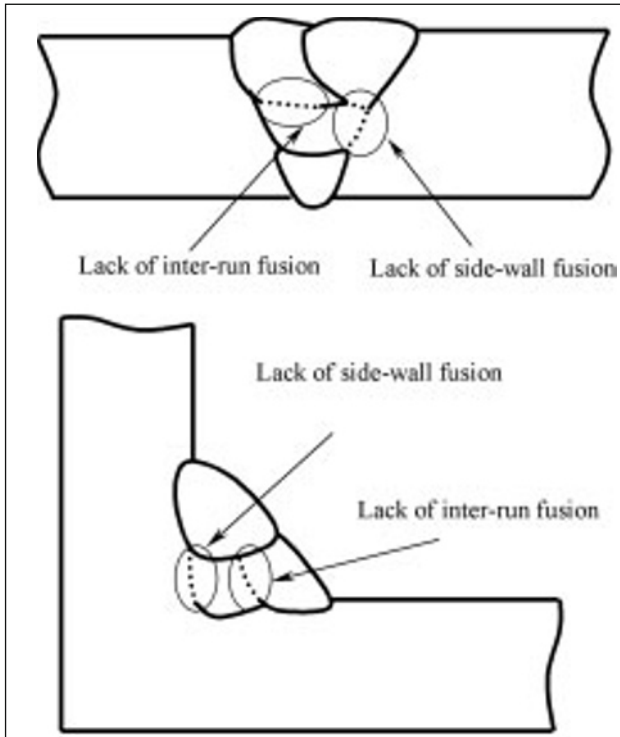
Typical lack of fusion in butt and fillet welds
